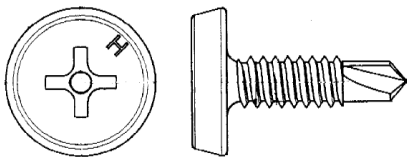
PHILLIPS PANCAKE HEAD (PPCH) SD FRAMER SELF-DRILLING SCREW
